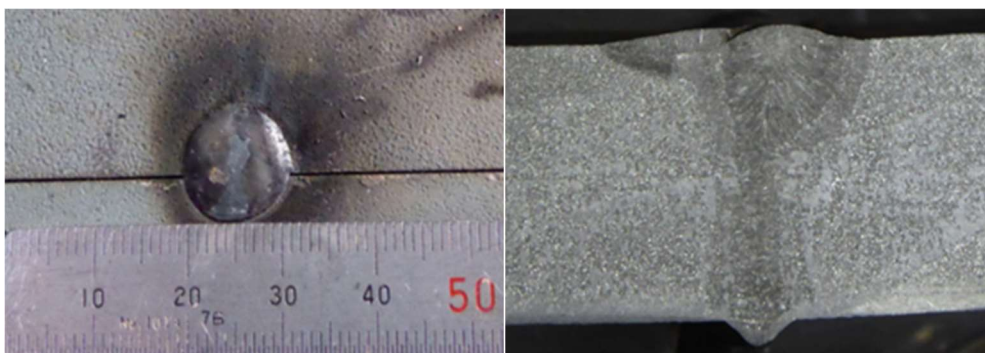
Macroscopic of proper tack welding shape
